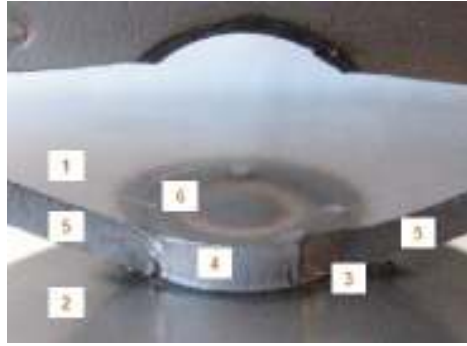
Particular zones of the spot weld fatigue failure surface.
